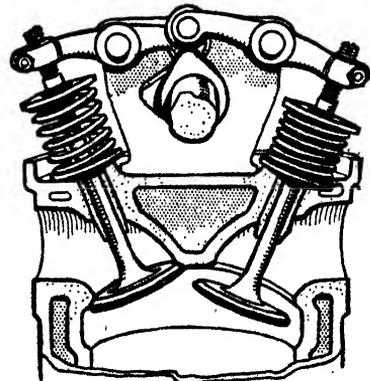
Central Overhead Cam-shaft operating through Rockers. Valves placed at an Angle in a Hemispherical Combustion Chamber
